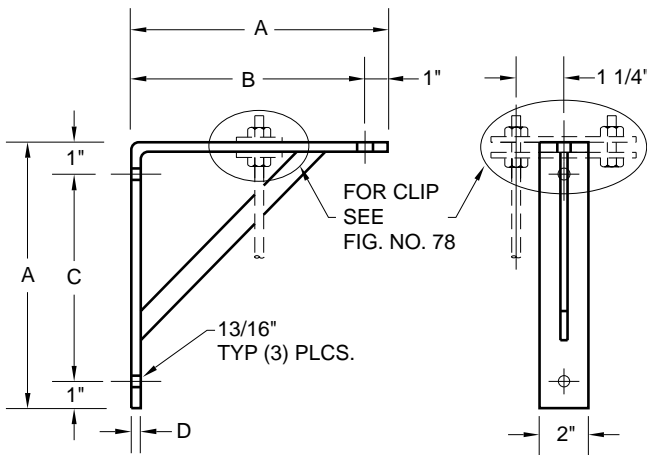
LIGHT WELDED STEEL BRACKET
